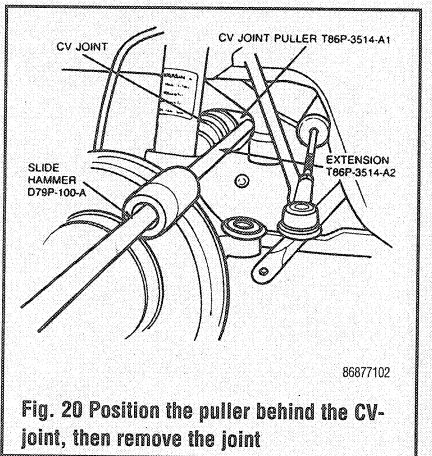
Position the puller behind the CV-joint, then remove the joint
